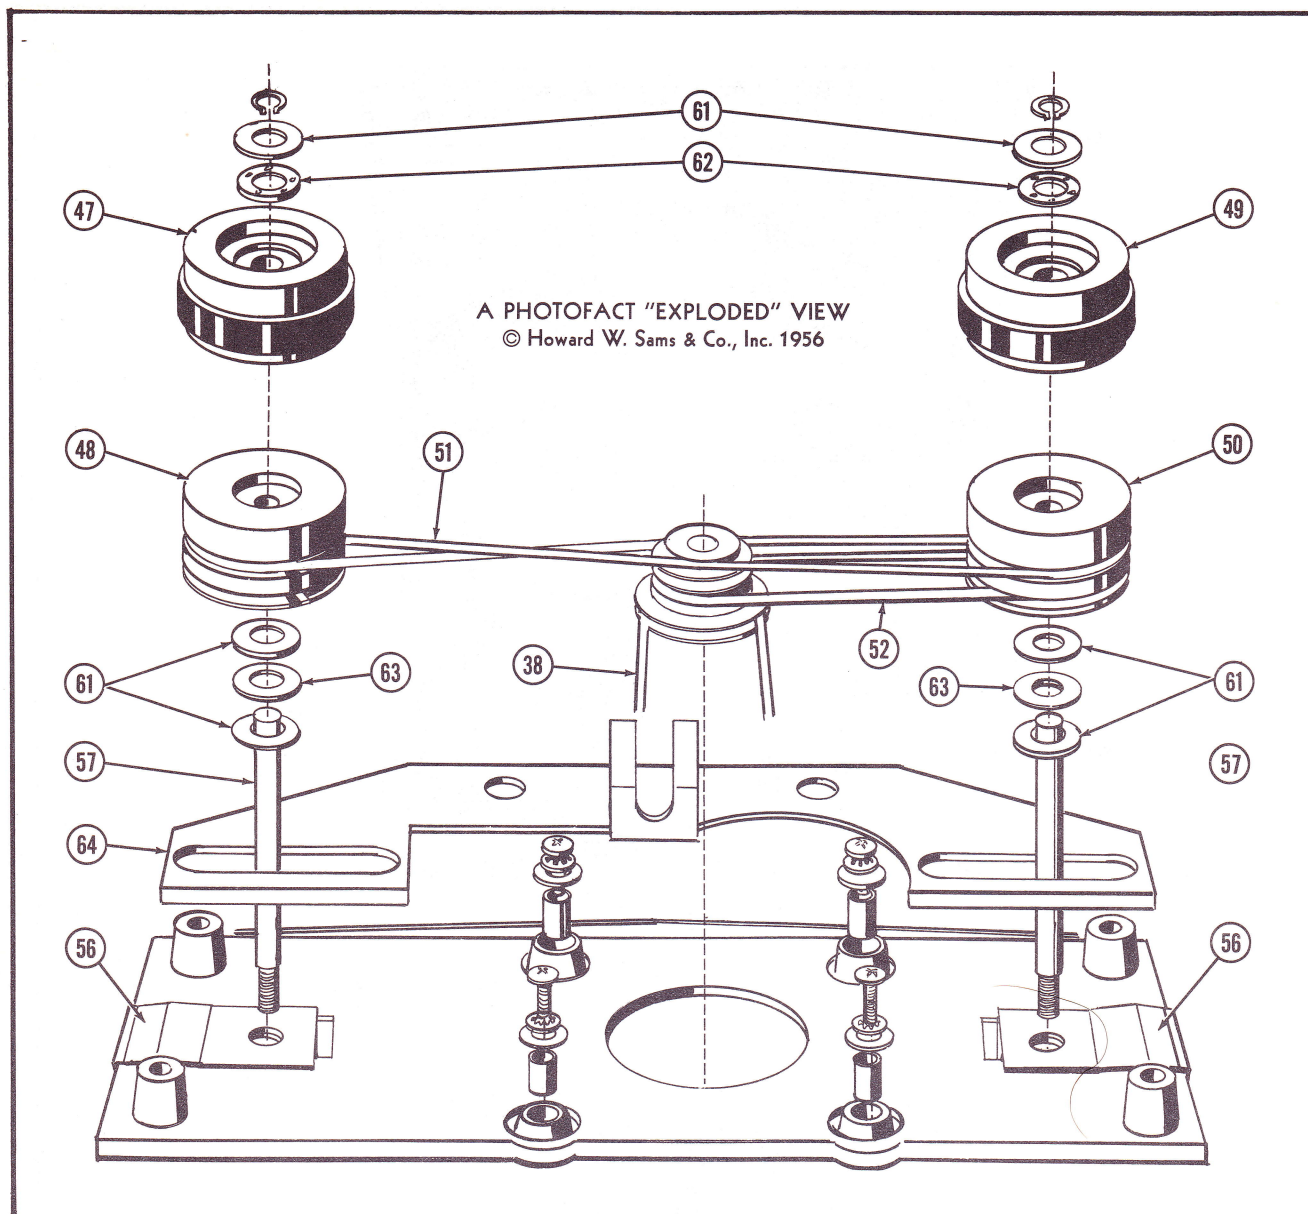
B. EXPLODED VIEW OF PARTS BELOW BASEPLATE.
